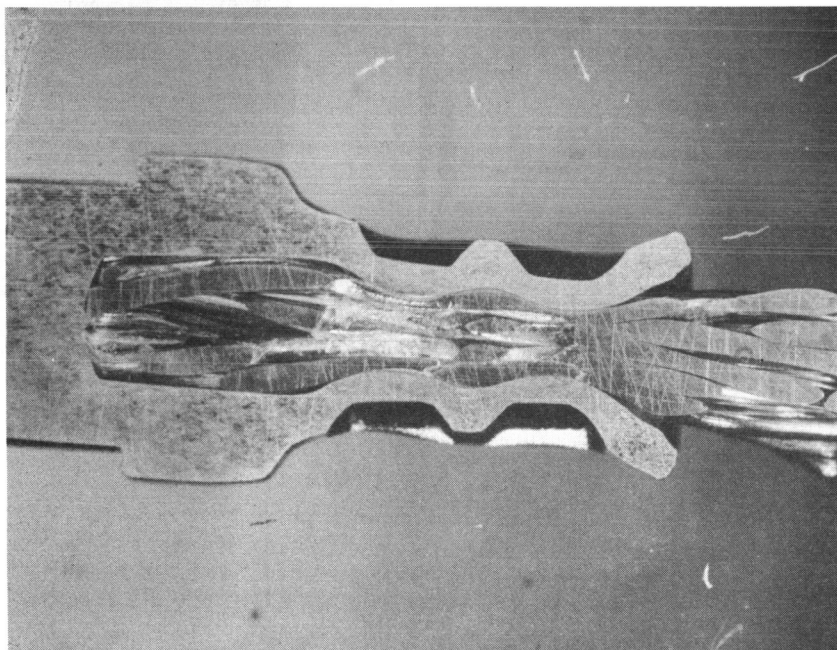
CESO-16-DO43-16 Crimped Contact Sectioned View
